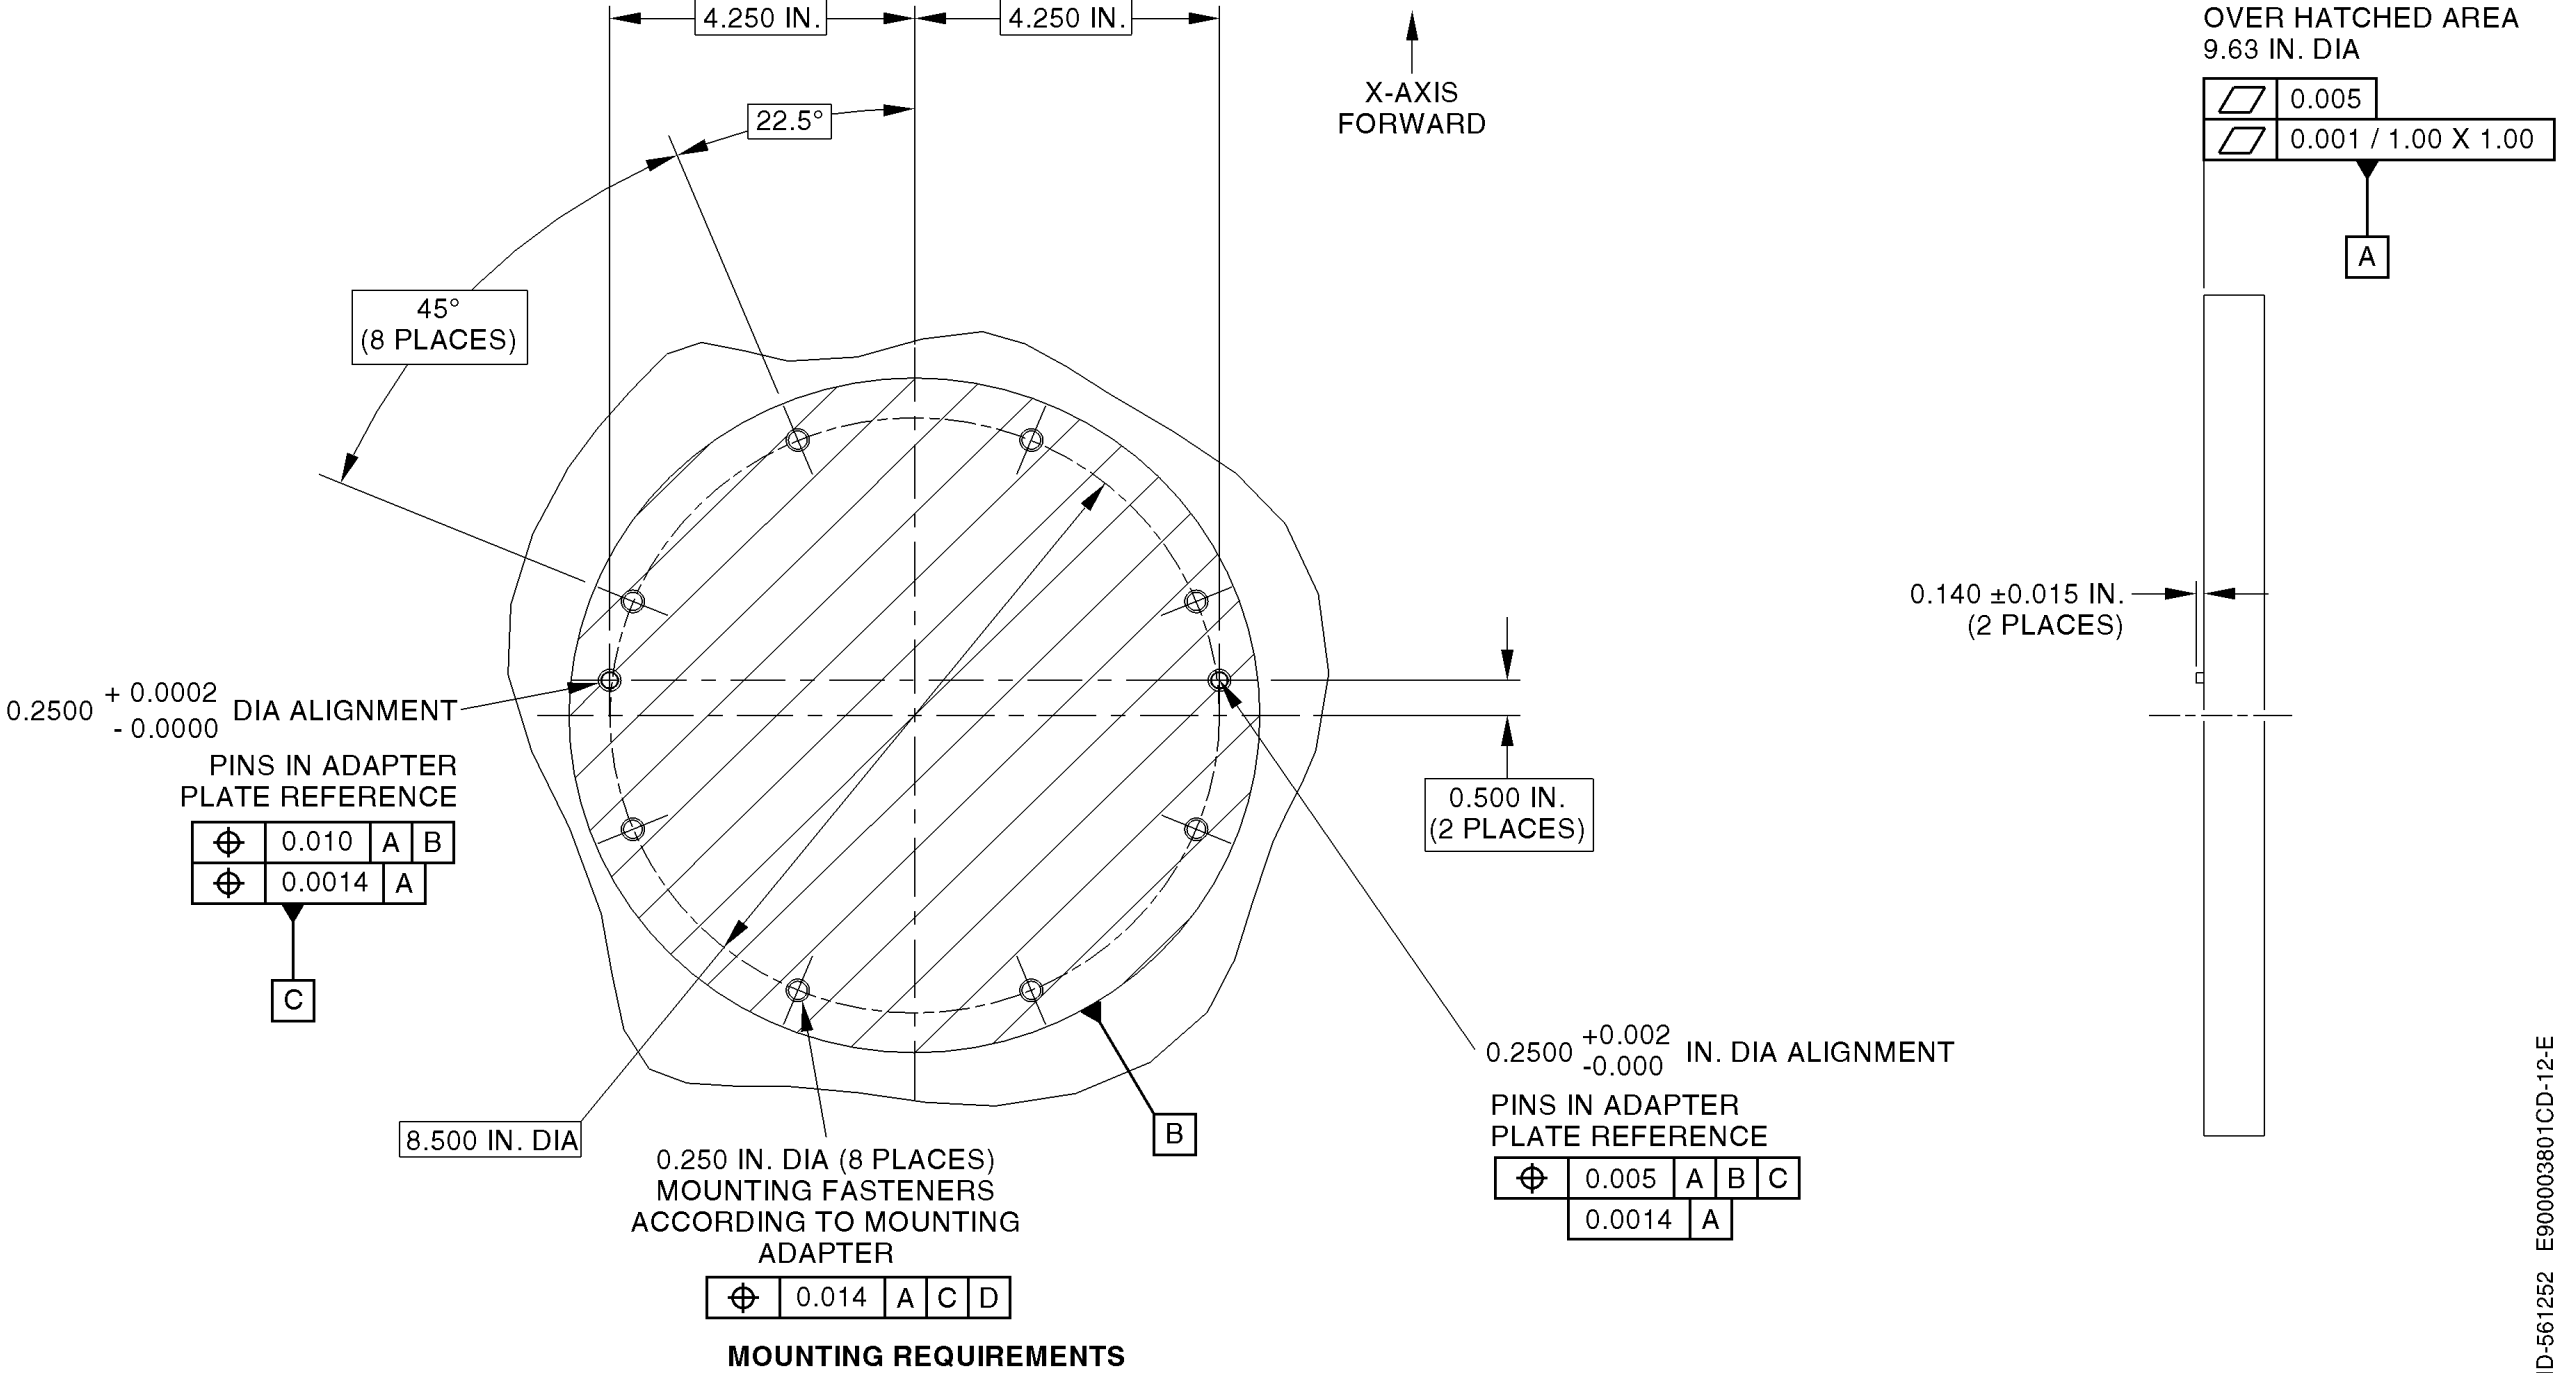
FMA Outline and Installation Drawing (Sheet 12 of 12)
